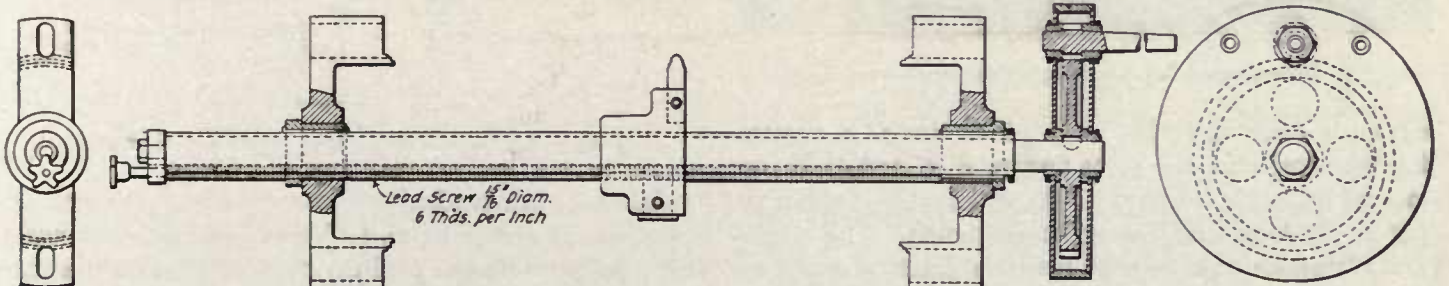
Boring Bar for Cylinders or Piston Valve Chambers.
